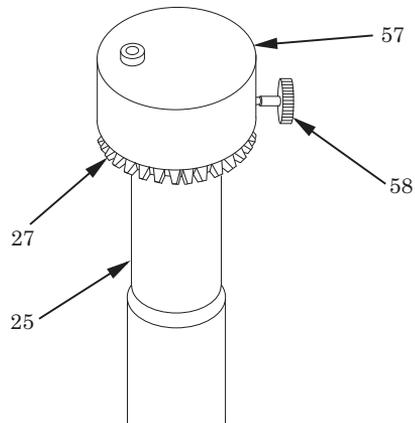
Drilling of Hole in Outer Elevating Sleeve.
